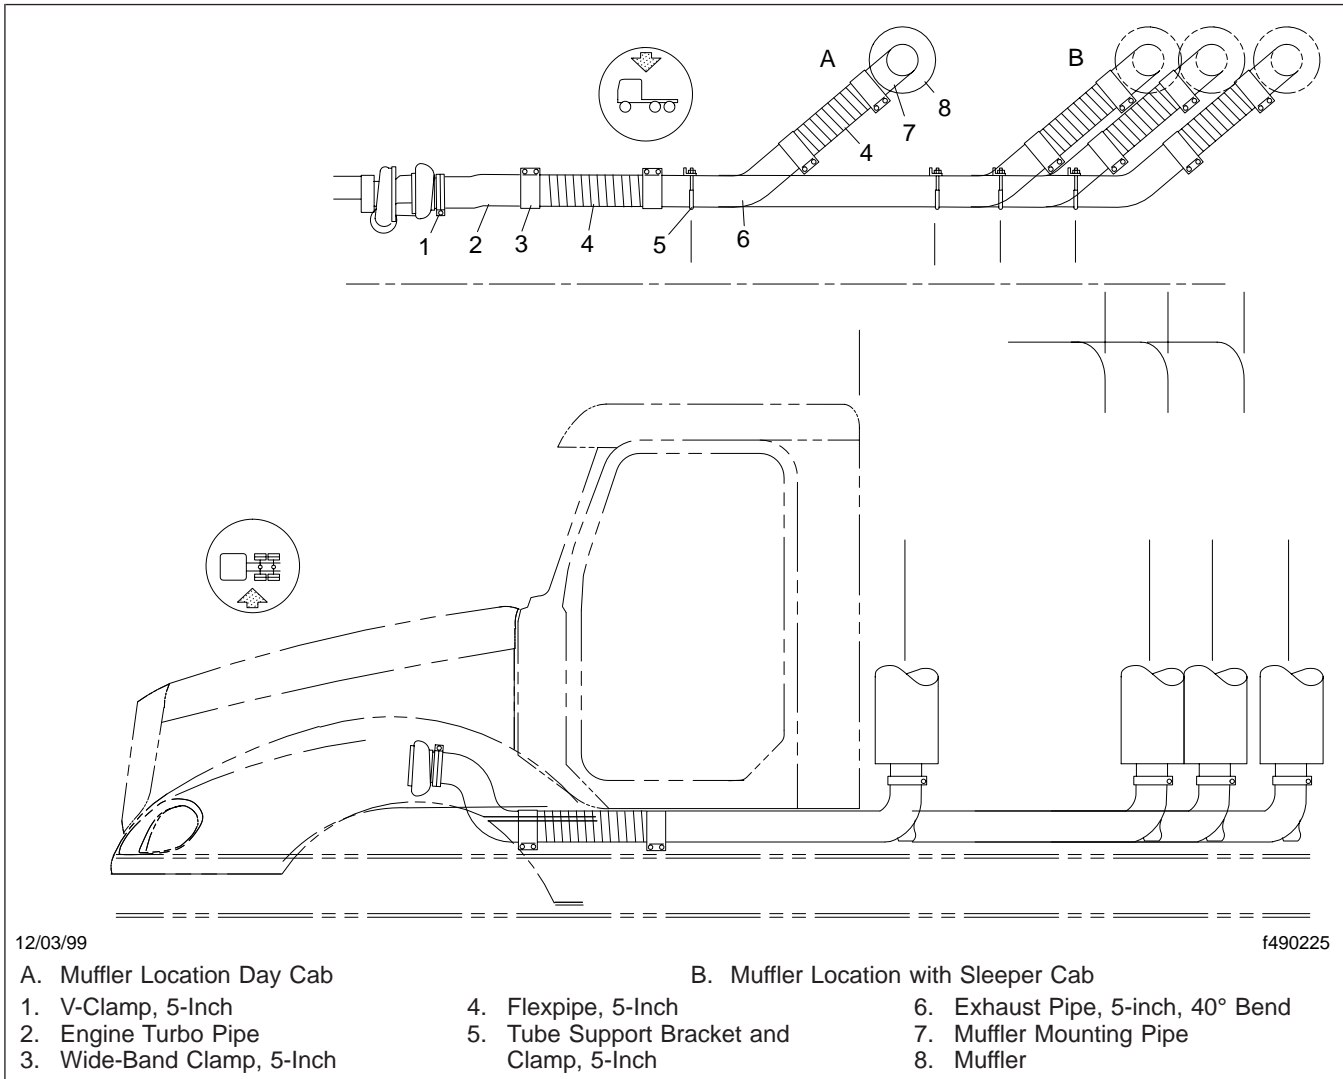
, Exhaust Piping for Cab and Frame-Rail Mounted Muffler
